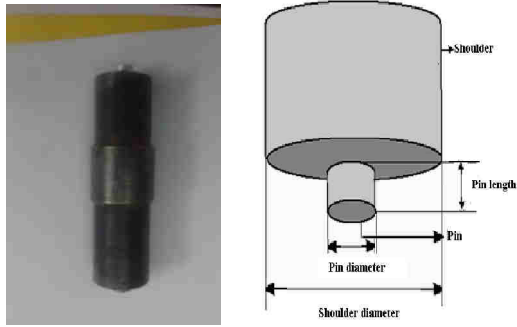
Friction stir welding Tool H13 and Tool geometry
